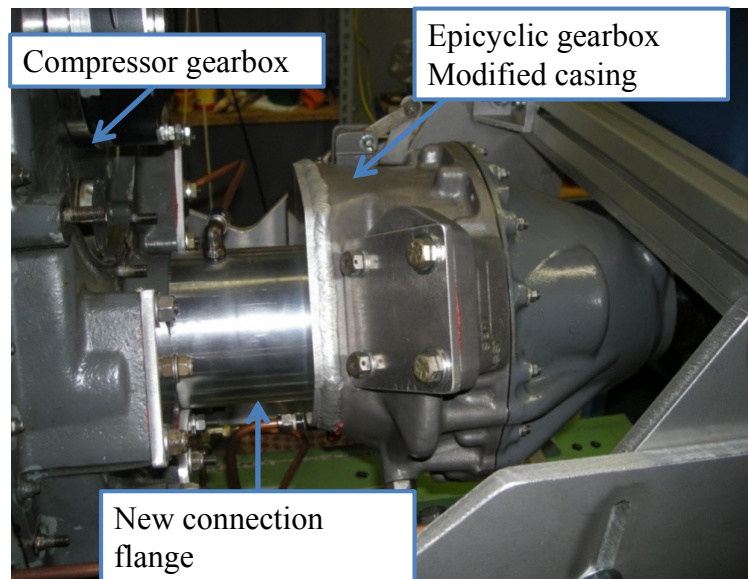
Assembly of the epicyclic gearbox into the test rig
